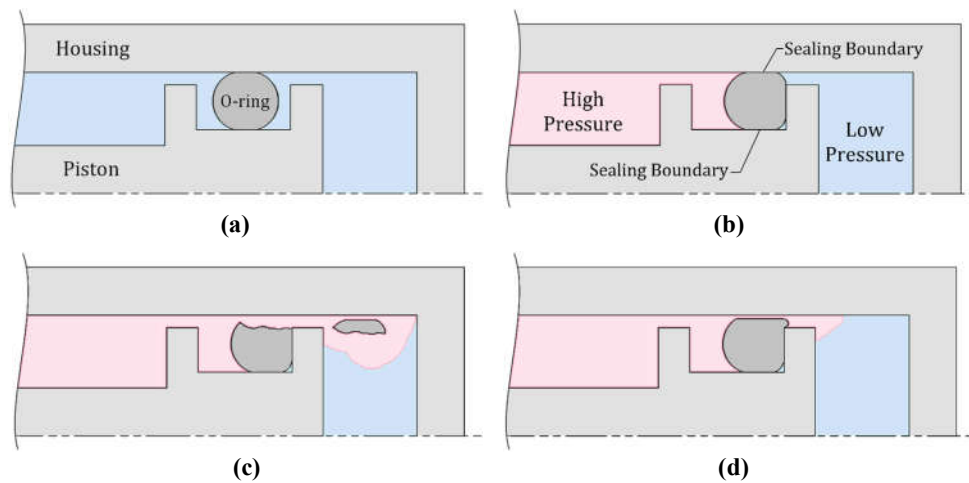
(a) O-ring compressed between a piston and housing with no differential pressure. (b) O-ring preventing fluid migration from a high pressure zone to a low pressure zone. (c) Leakage due to fracture of the seal. (d) Leakage due to elastic leak of the seal.
